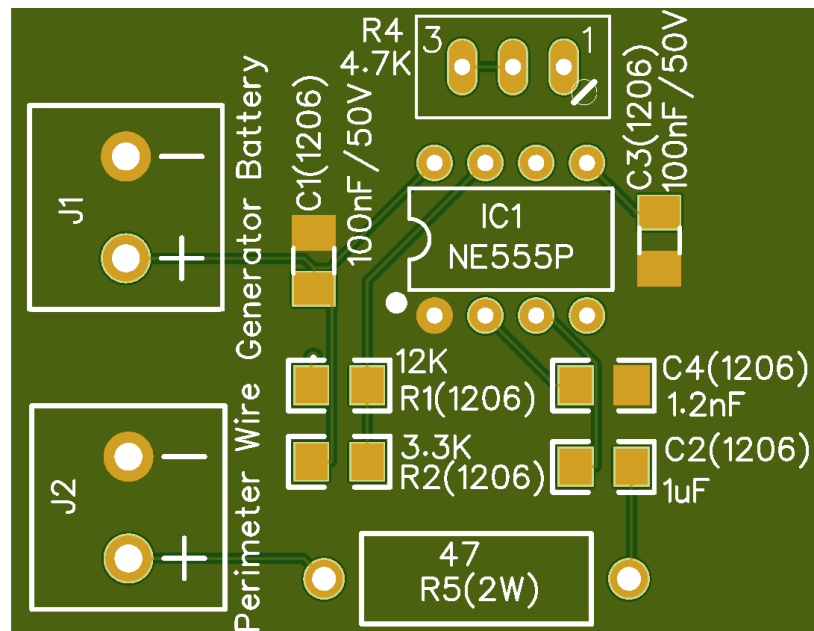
PCB of Perimeter Wire Generator made by Brandei Dieter
